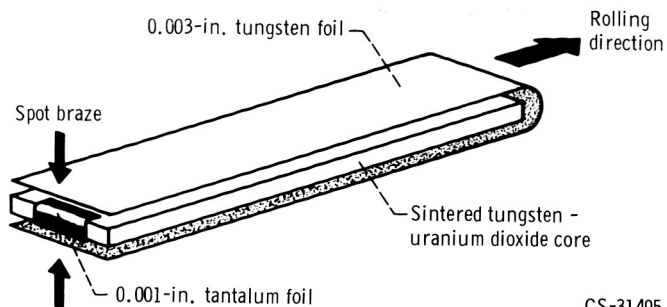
Core-clad assembly of a fuel plate prior to rolling.
